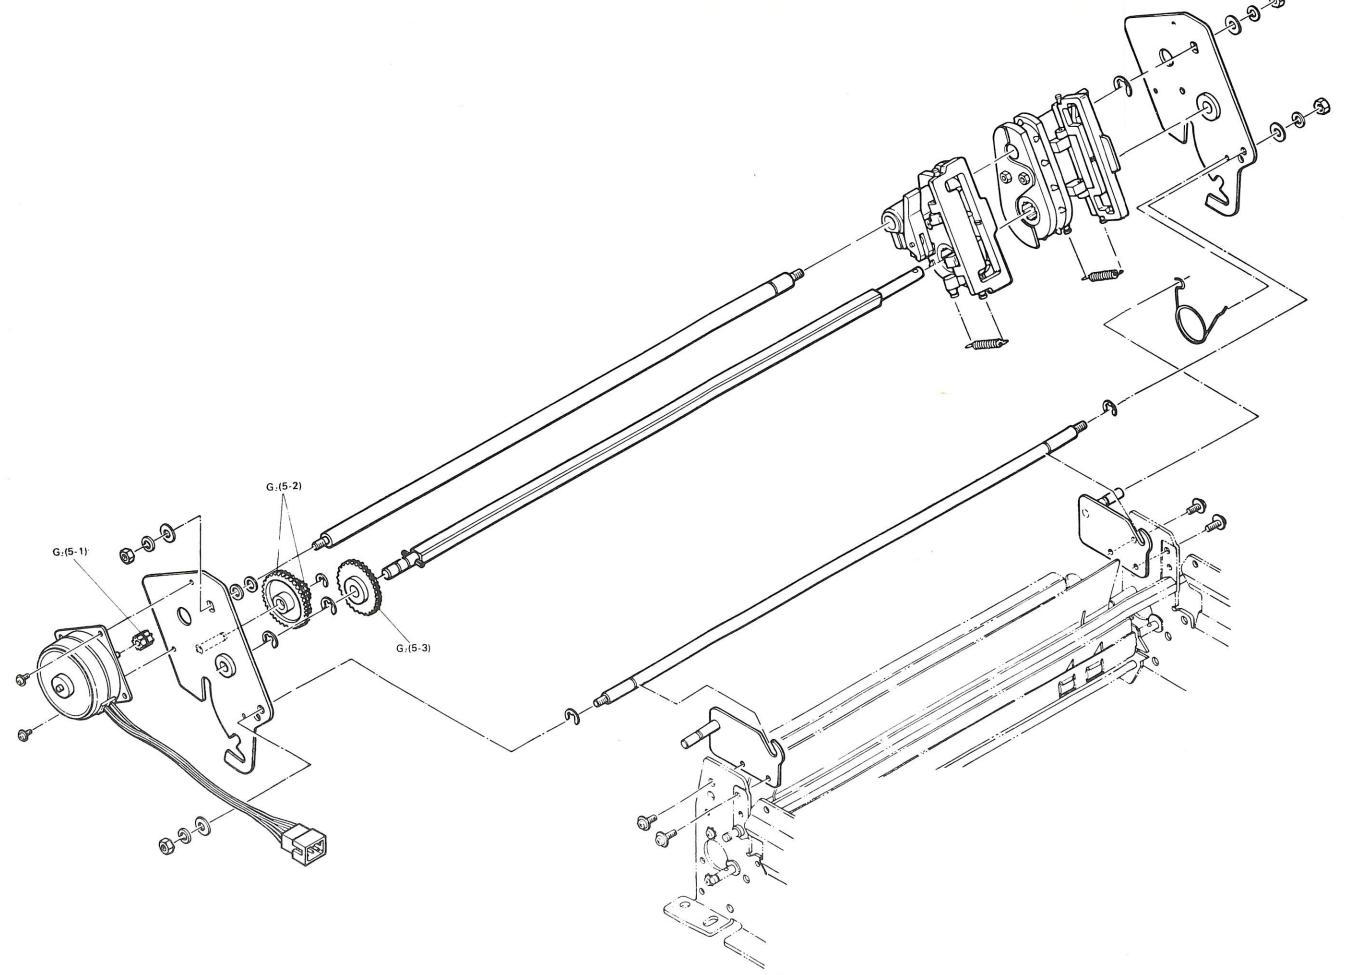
Lubrication Points and Bonding Points (Tractor Unit)
